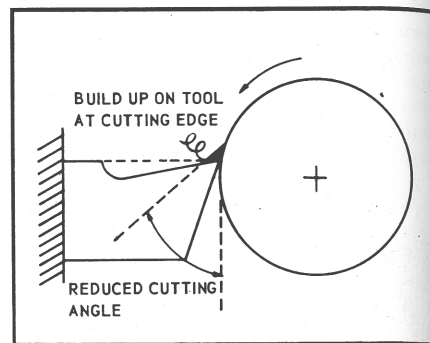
Metal accumulation at the cutting edge of the tool reduces the cutting angle.
